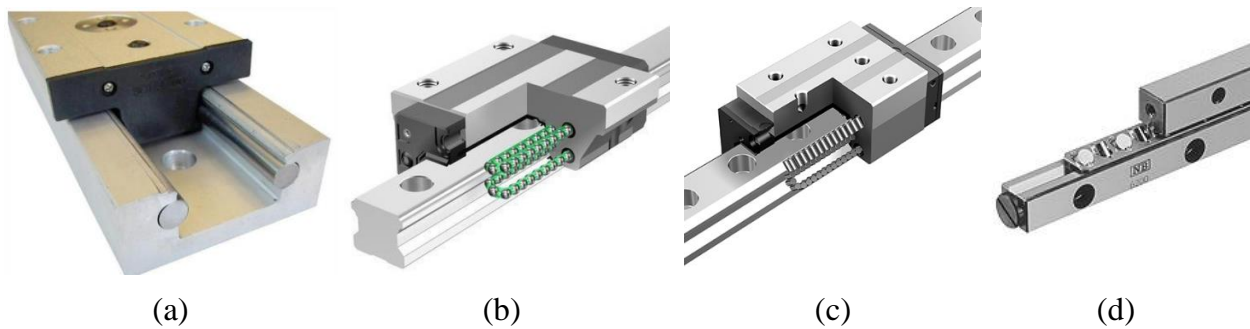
(a) Sliding bearing [42], (b) re-circulating ball bearing [43], (c) re-circulating roller guide [43], and (d) cross roller bearing [44].
